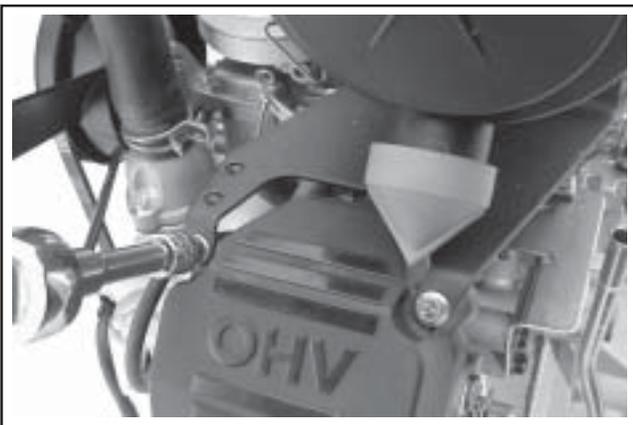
Removing Upper Valve Cover Mounting Bracket Screws.
